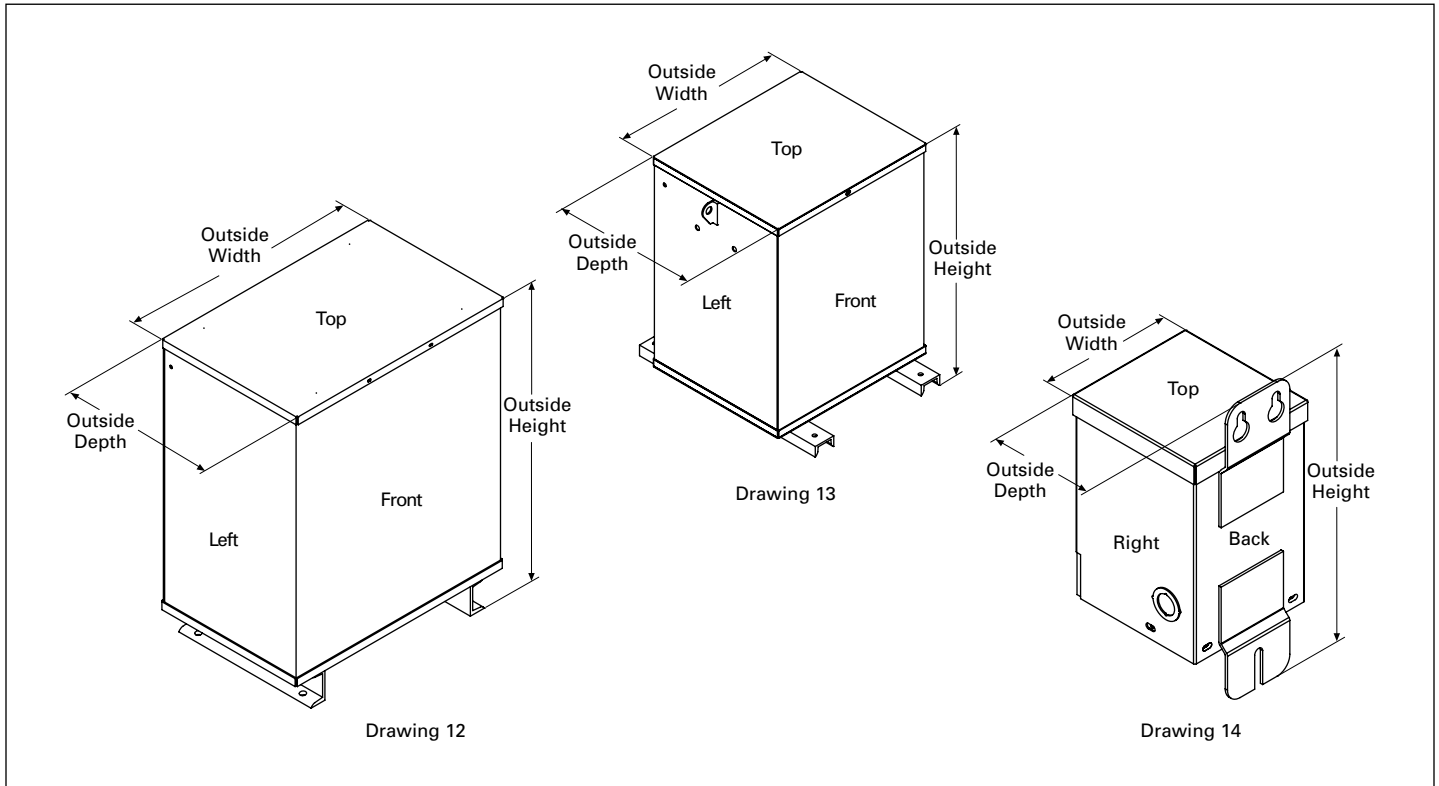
Enclosure Dimensional Drawings—Encapsulated Transformers Type EP (Single-Phase)
